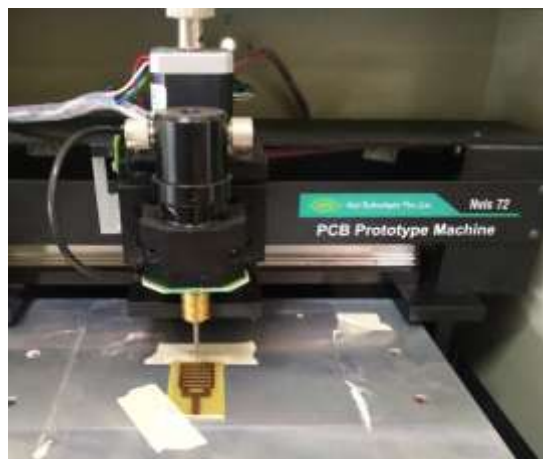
Steps for suggested antenna to fabricate on the PCB
